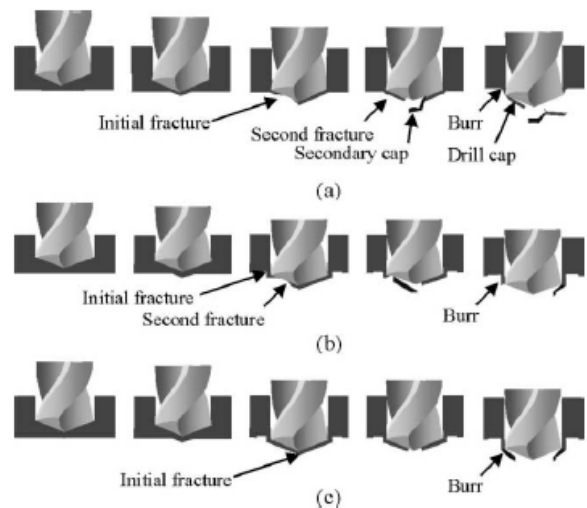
Mechanism of burr formation in drilling. a) Uniform Burr; b) Transient Burr; c) Crown Burr (Min et al., 2001 and Bordinassi et al., 2004).
